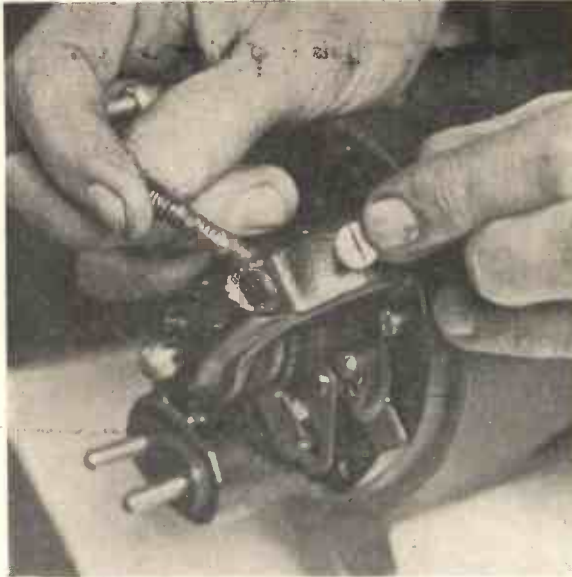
EXAMINING THE MAIN BEARING GREASING WICK AND SPRING.
